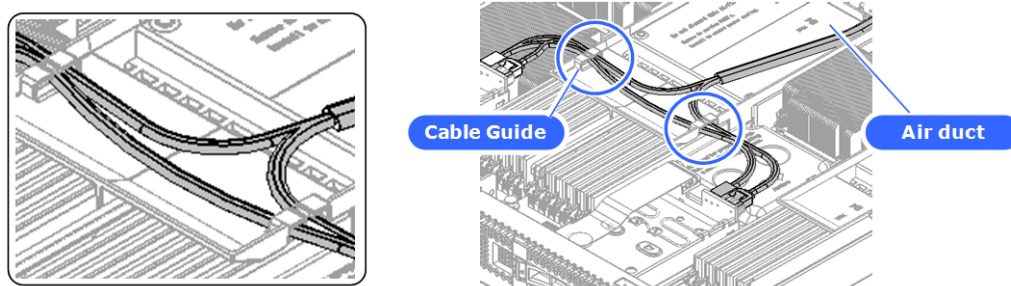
Fixing the SAS cable- CB 540A A1/B1
